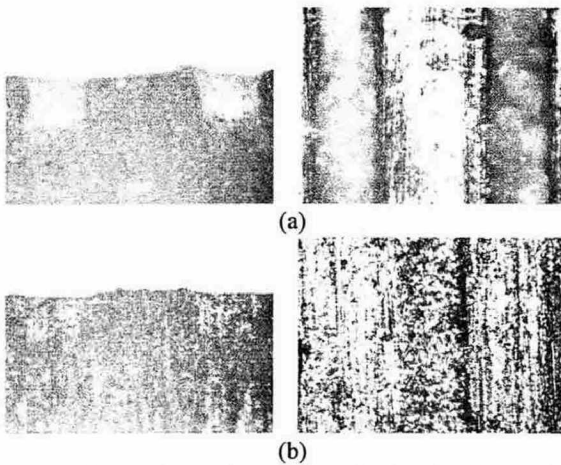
Grooved specimens coated with lubricants; (a) epoxy-based coating with PTFE, (b) PE-based coating with MoS₂.
